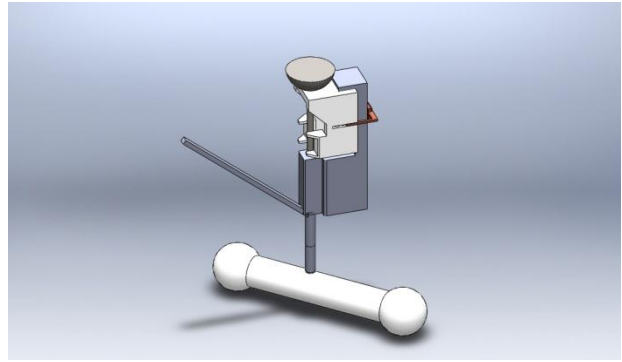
SolidWorks drawing of the hydraulic slider design. The slider is at its top most point demonstrating when the surgeon would begin drilling.
